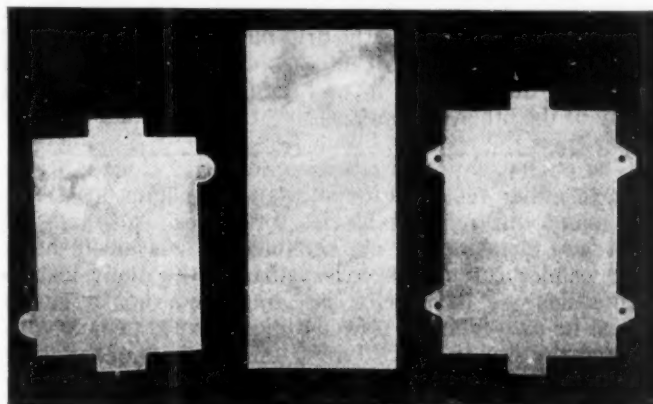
STEEL PLATES 1/4 INCH THICK USED FOR MOUNTING PATTERN.
